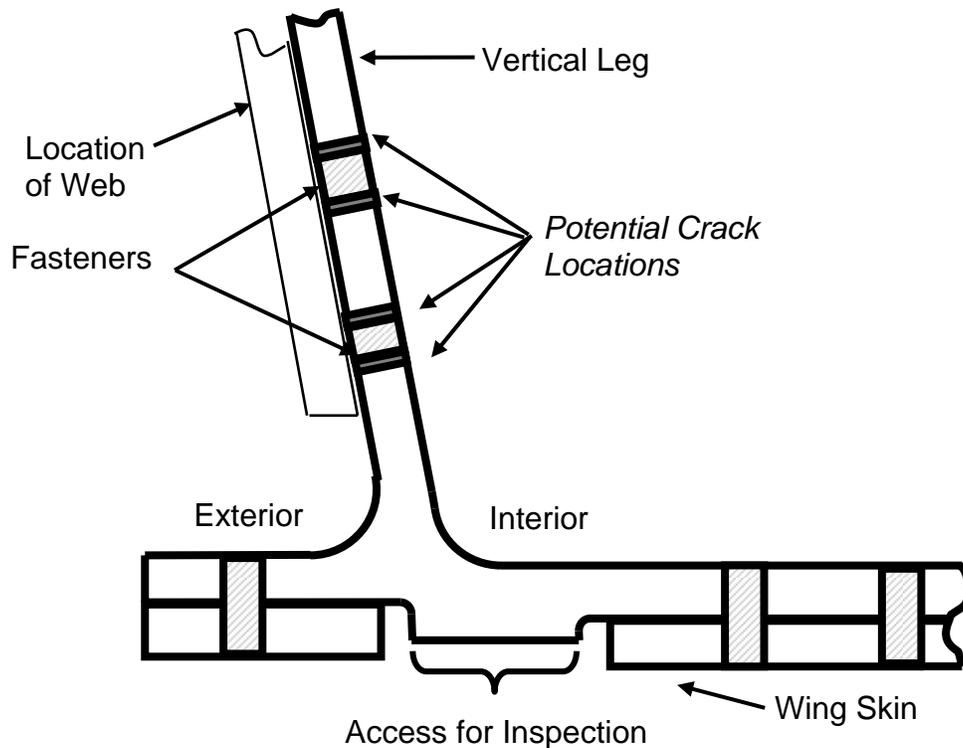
Side view of the lower spar cap structure showing the limited access and the location of the potential fatigue cracks that must be detected by this inspection.
